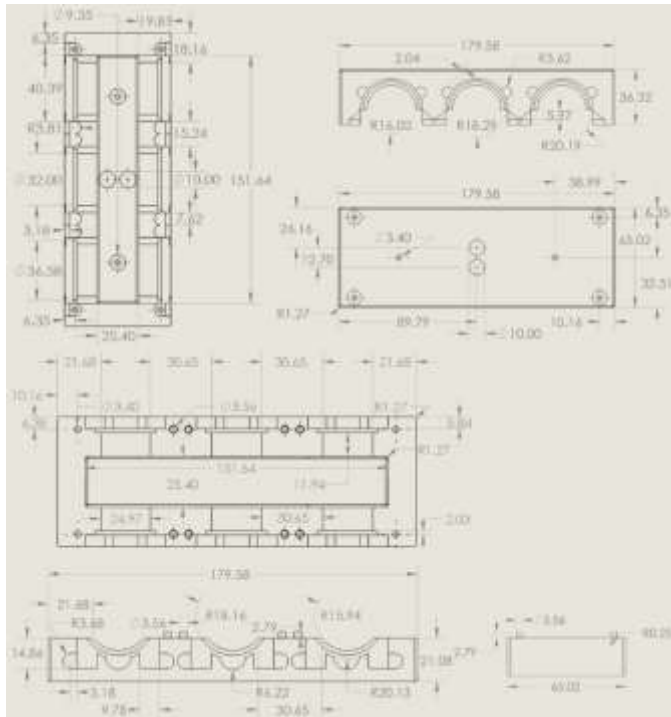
CAD Models and Dimensions of the Top Half of the Pump Holder (Top) and Bottom Half of the Pump Holder (Bottom)
